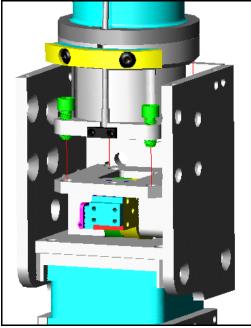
Attach the Neck Assembly to the Neck Pitch Mechanism
